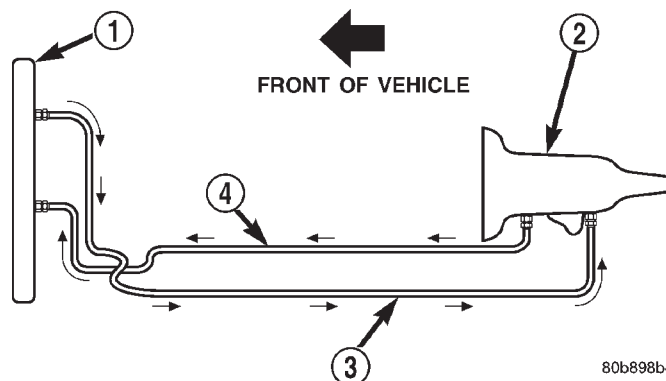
Oil Flow to Cooler—Top View (Typical)
